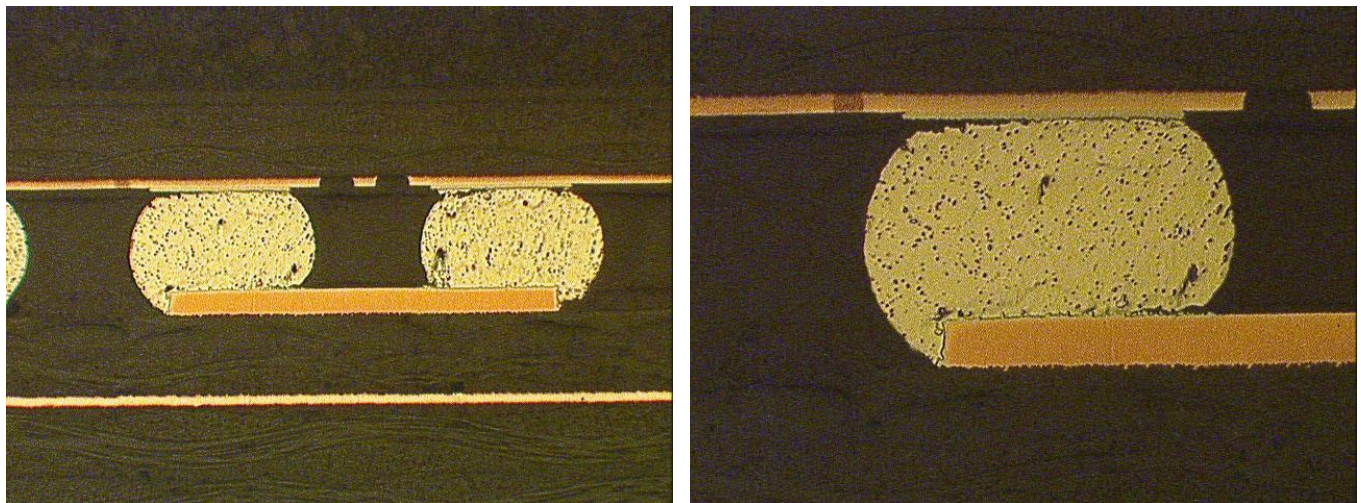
Reworked CSP-100 Solder Joints, Board 164, Component U33, Initially SAC305/SAC105, 1 rework SnPb/SAC105, DNF
